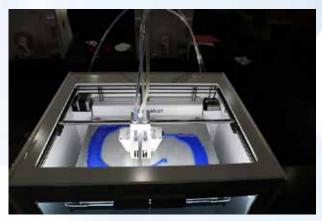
Actual Printing of Face Shield Frame thru ULTIMAKER S5
